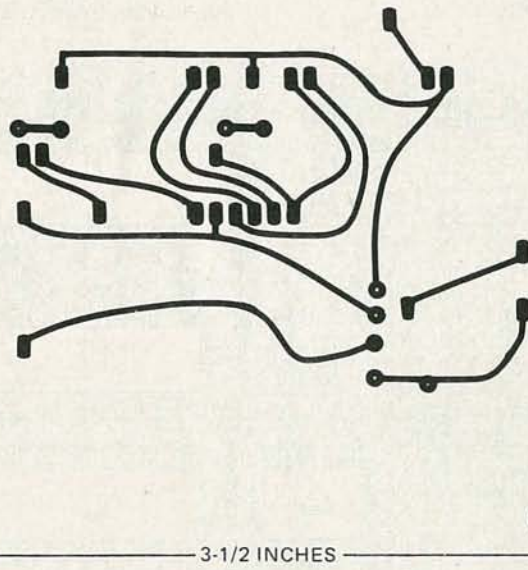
FOIL PATTERN for the component side of the main board is shown here full-scale. If you make your own PC boards from the pattern shown, be sure to solder all components to both sides of the board.
